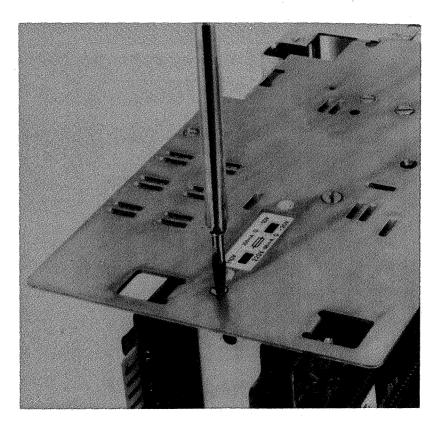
POWER SUPPLY RETAINING SCREW LOCATION
